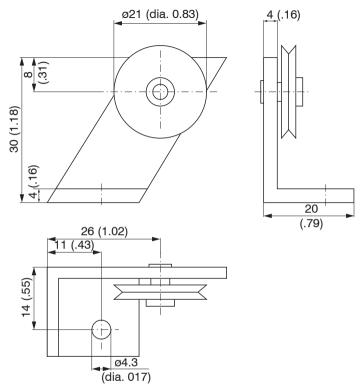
Guide pulley TR3-WDS fix with mounting socket, dimensions in mm (inches), not to scale
